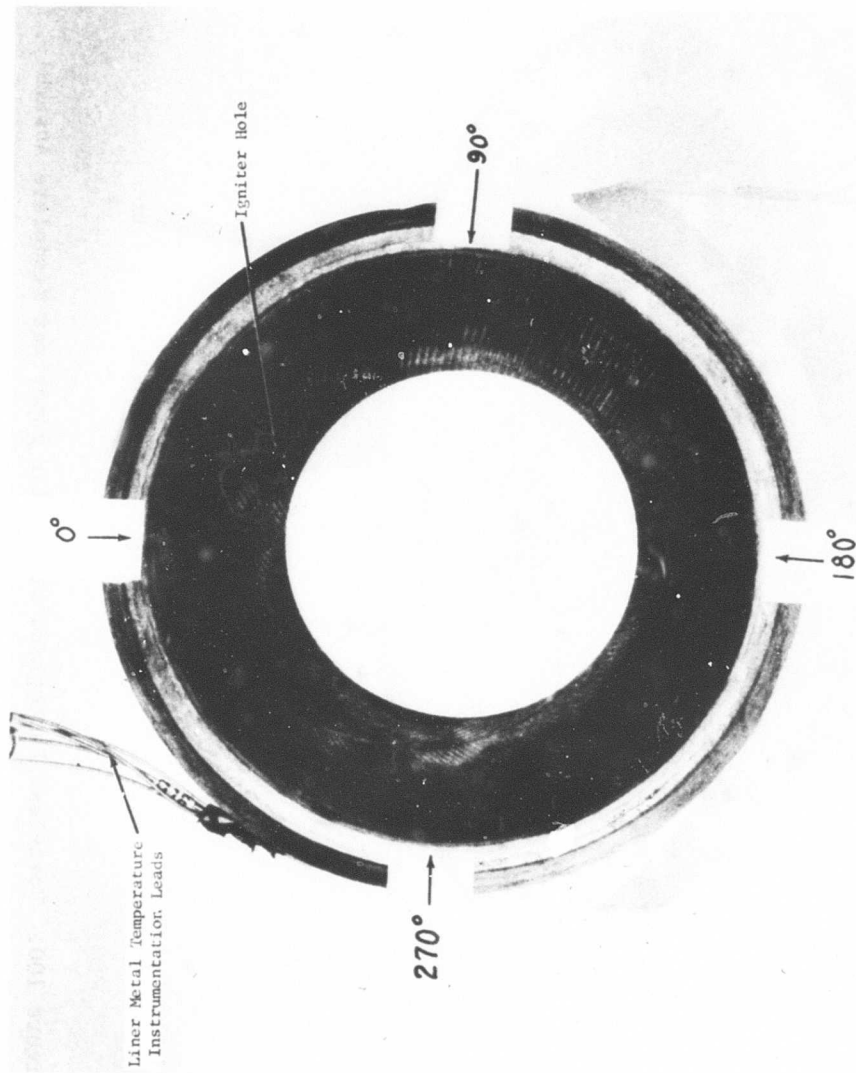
Post-Test Photograph of Hot Side of Transpirationally Cooled Outer Liner After 53:40 Hours of Hot Testing.
